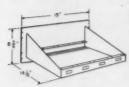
RACK Mounting Kits enable quick assembly of laboratory power supplies.
